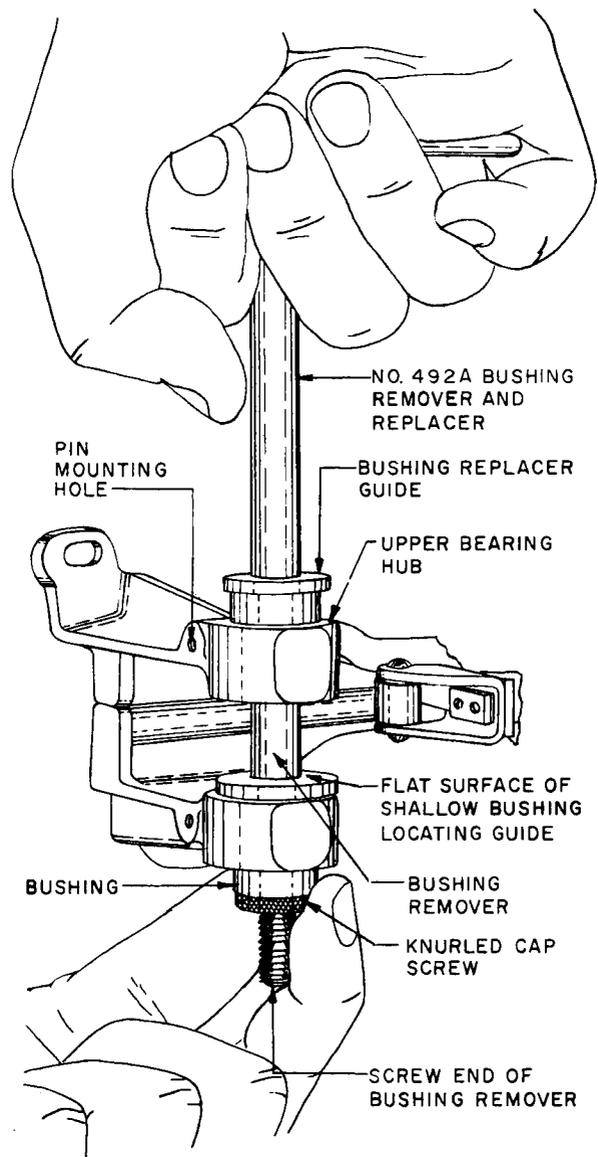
Method of Removing Bushing from Lower Bearing Hub of Reciprocating Bar-type Interrupter Using the No. 492A Bushing Remover and Replacer
